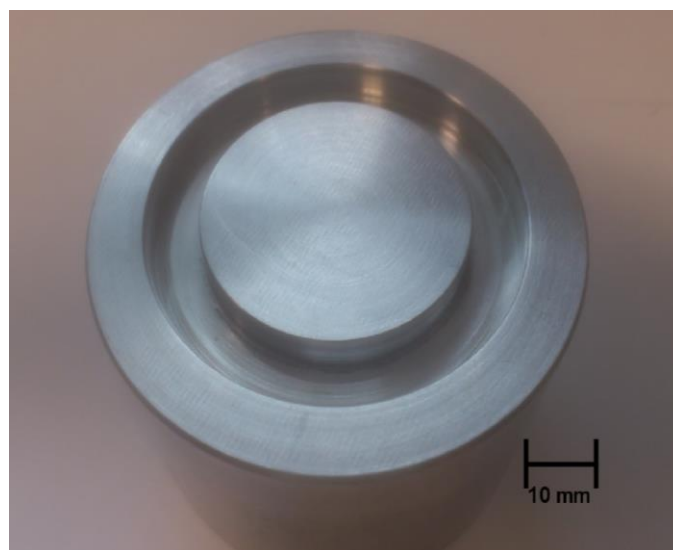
An O-ring housing bottom surface containing a 7.6 mm wide groove to fit in the O-ring.
